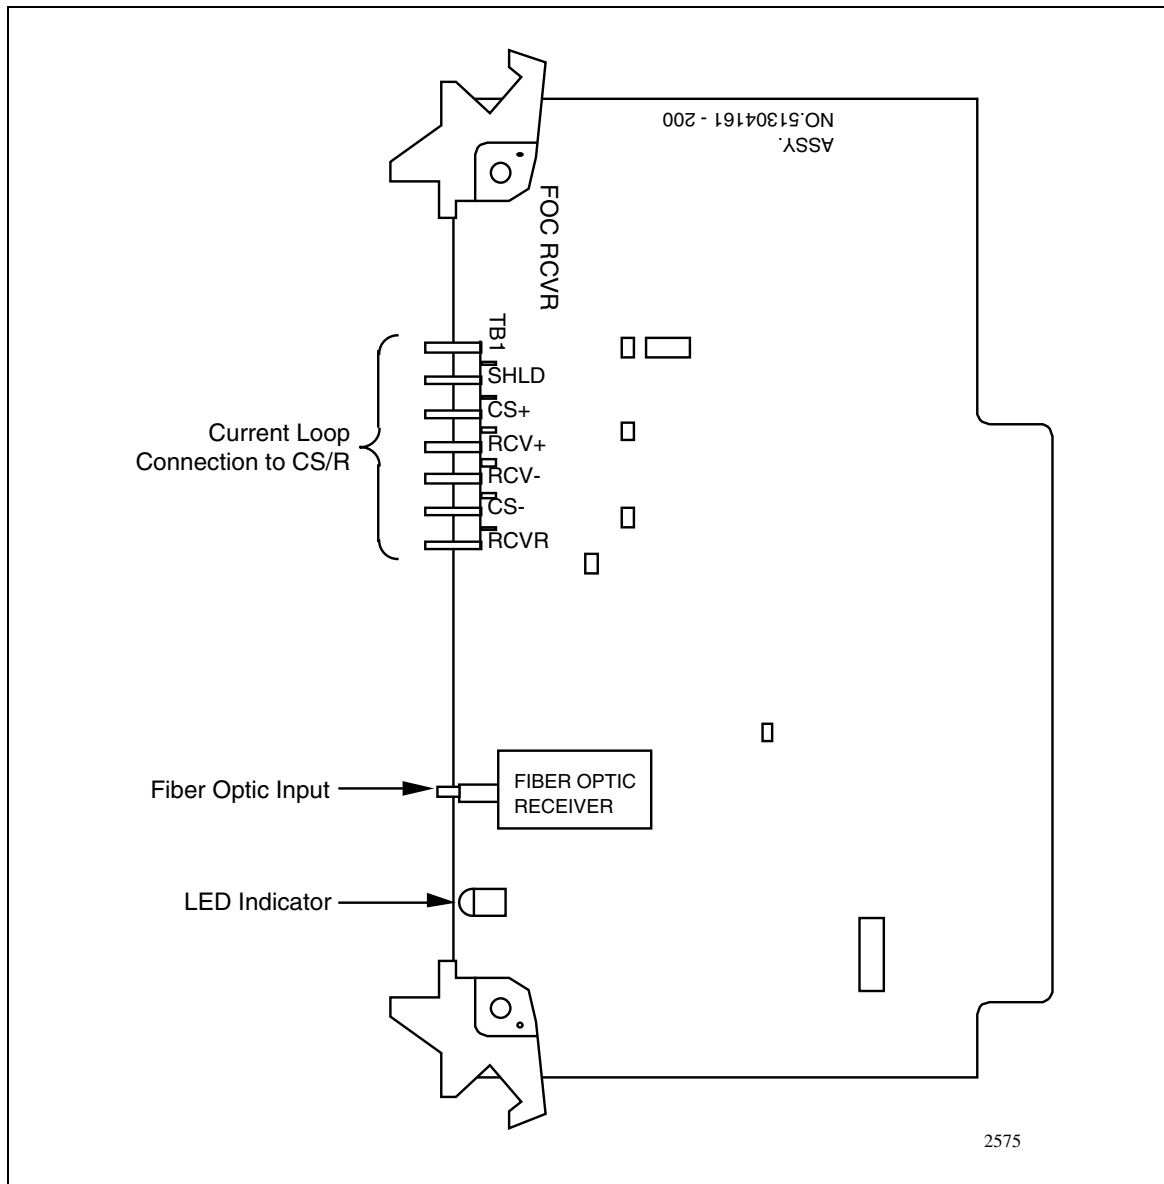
Fiber Optic CLOCK Receiver (FOCR) Board Assembly
